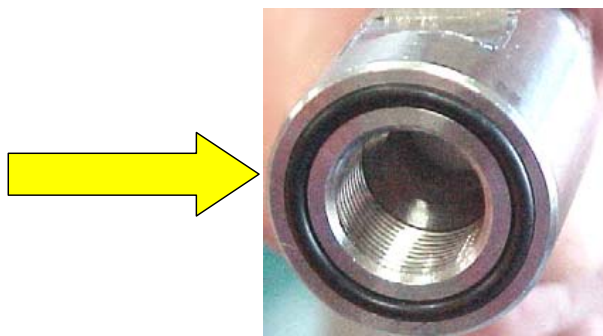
Inspection valve assembly - Assembly of removable part
